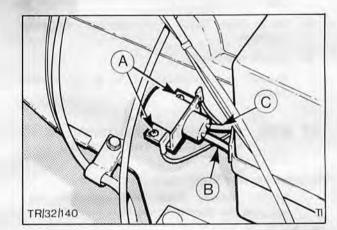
A – Mounting screws B – Hose to reservoir C – Hose to screen
